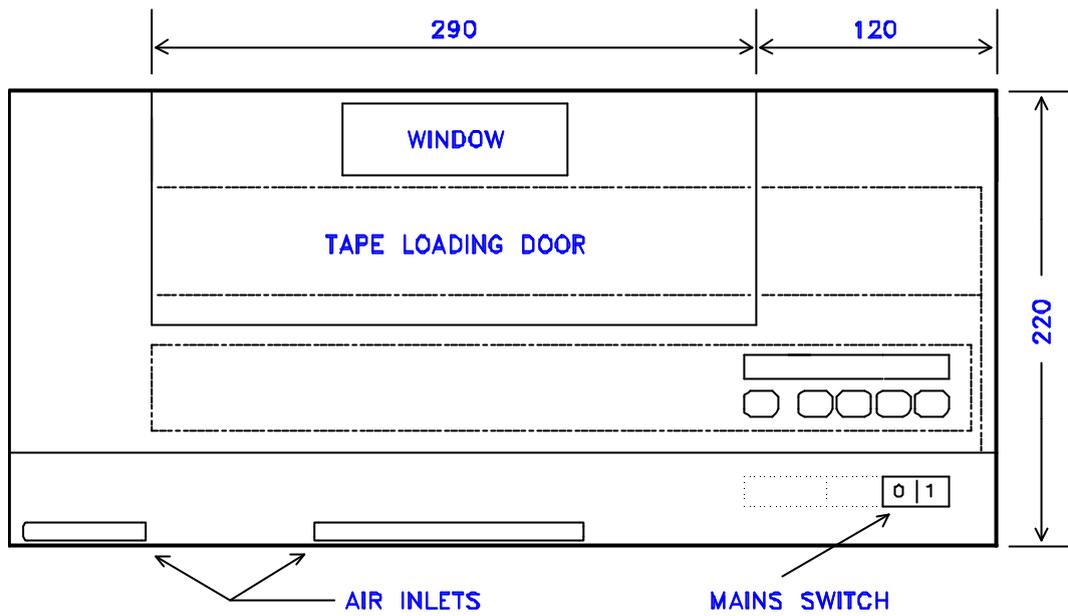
(c) 9914 FRONT & REAR DIMENSIONS
